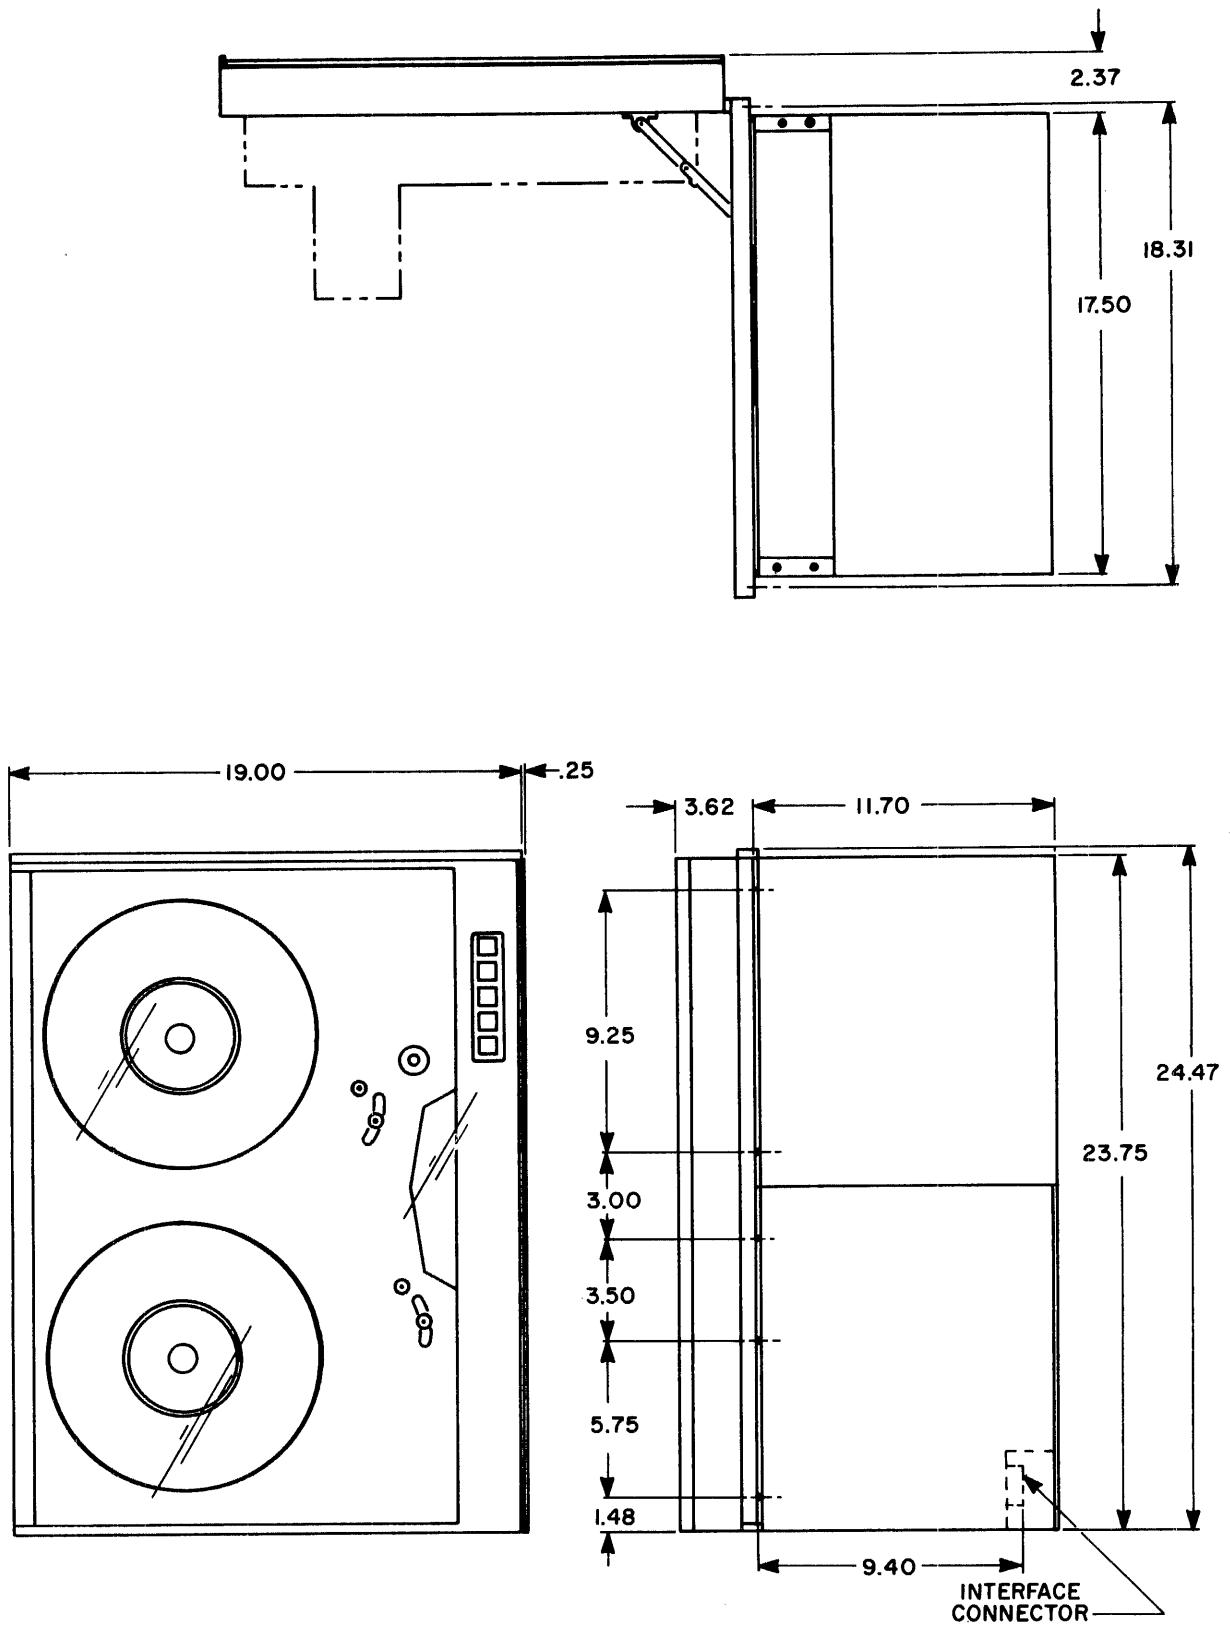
MOUNTING DIMENSIONS (10-1/2 INCH TRANSPORT)
